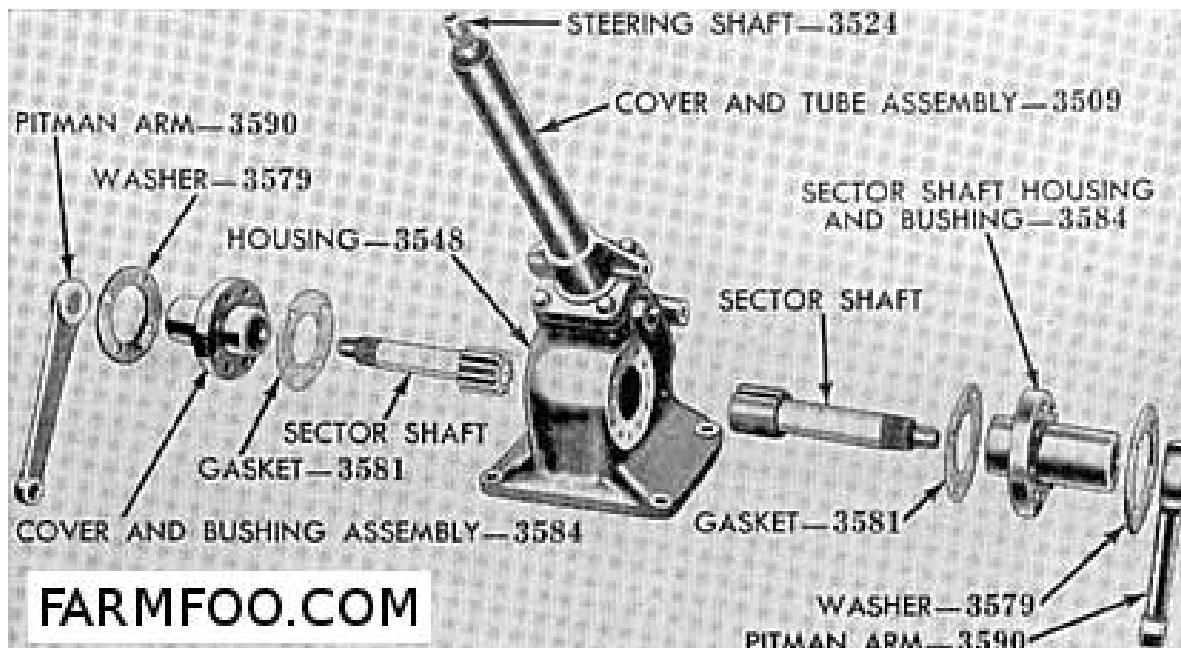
Disassembled sector shafts of ball nut gear used on model 8N tractors prior to serial 216989. Later type is shown in Fig. F012.
